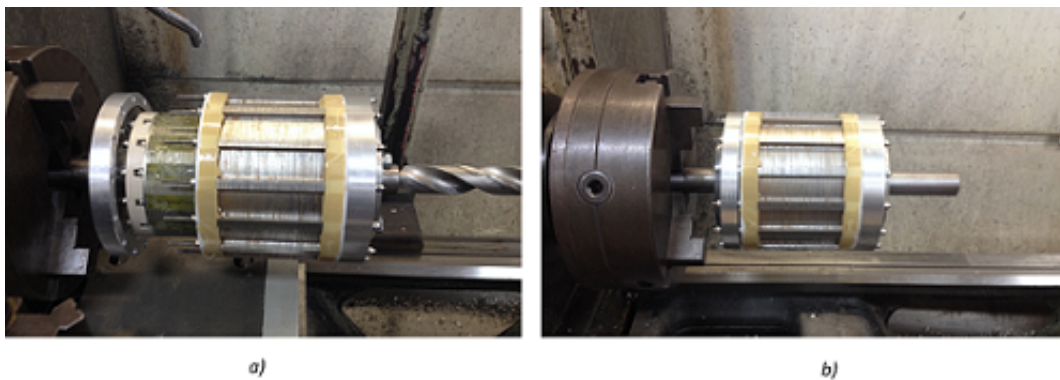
Final assembly process (a) inserting the PM carrier using guiding rods (b) final positioning of the PM carrier
